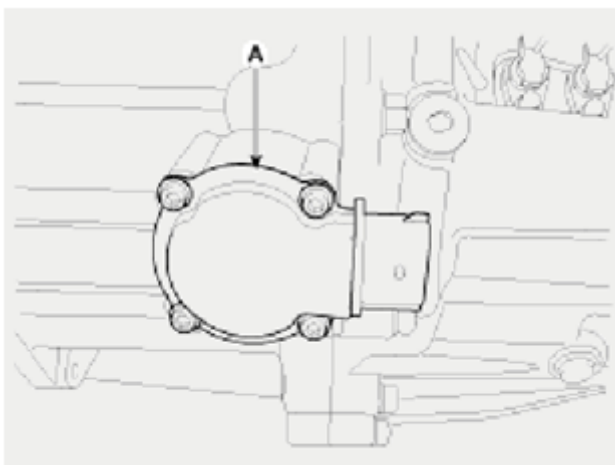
Identifying Clutch Actuator Motor Connector
